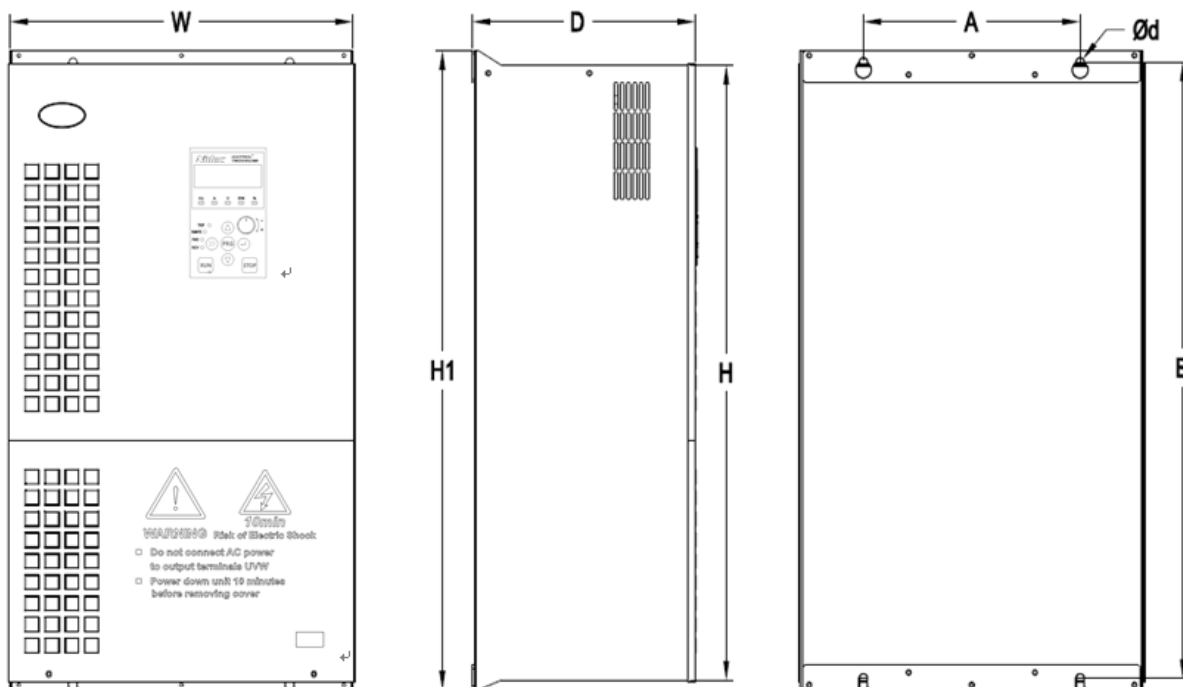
Product Outline, Mounting Dimension Schematic diagram
